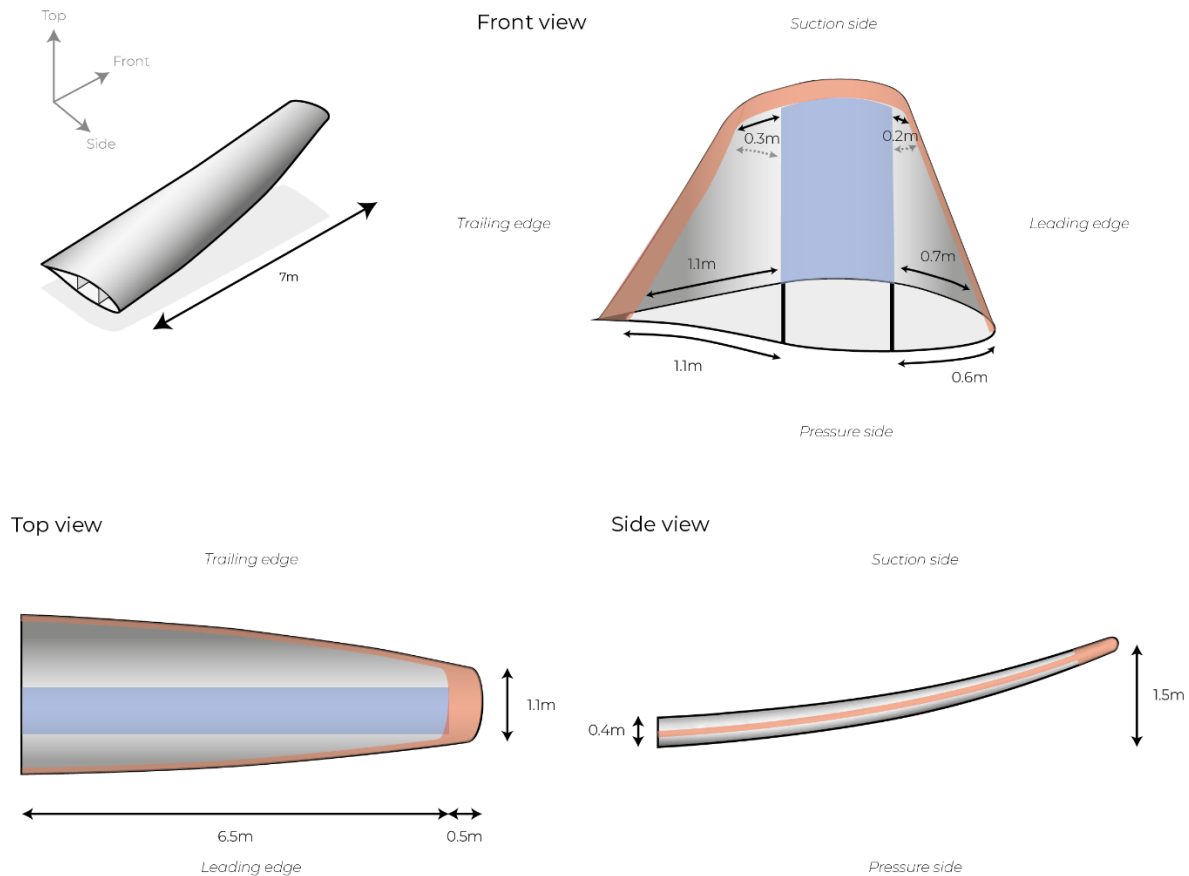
Dimensions of the elements retrieved out of outboard.
